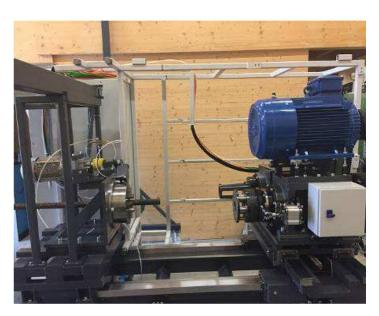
The rolling head of the old machine now goes on the new CNC machine WIAP Open and close above the cylinder. The longitudinal factor of the workpiece by the rolling is automatically calculated using an R parameters in the CNC program and taken into account
